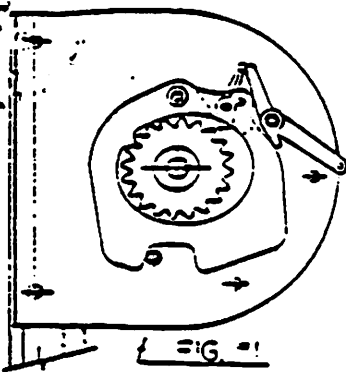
Operating bracket as assembled to barrel end and guides, shown with governor pawl in the released position. Key Retaining Wheel (R.W.) to barrel shaft using large washers for proper spacing and alignment with governor. The R.W. should not rub side of bracket when operating.
